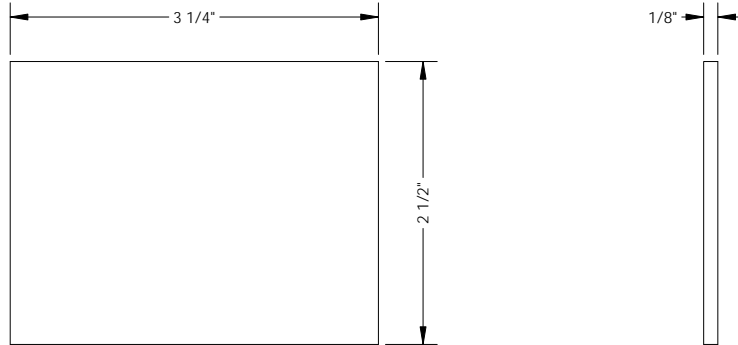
Recommended Steel End Cap Dimensions (DMF #602023)
